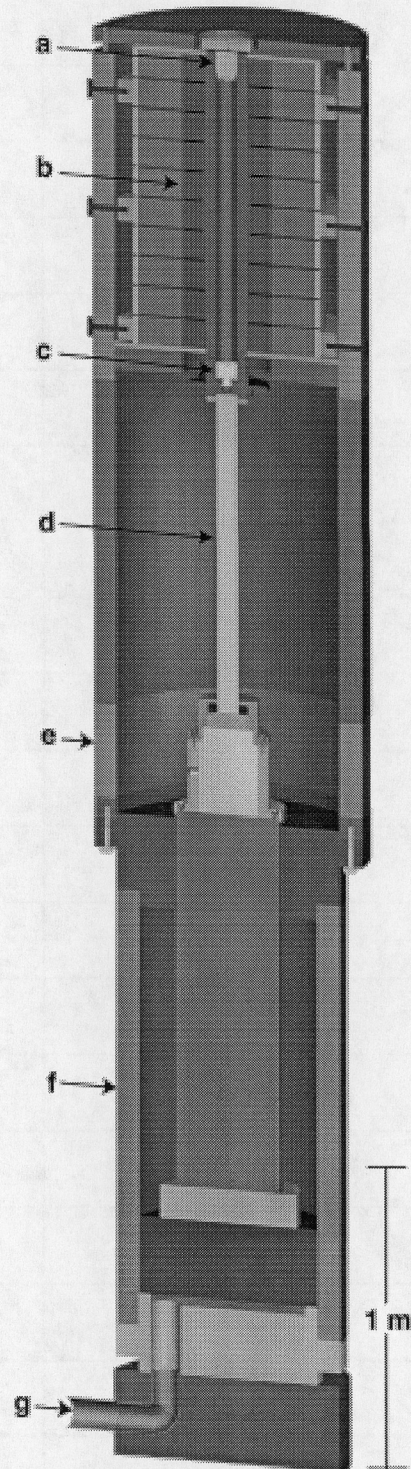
The A2 LITE UHP Intensifier. The major components are: (a) Nozzle end closure; (b) UHP vessel; (c) Moving seal; (d) UHP piston; (e) Outer vessel; and (f) Hydraulic ram. Hydraulic fluid enters through a manifold shown schematically at (g).
